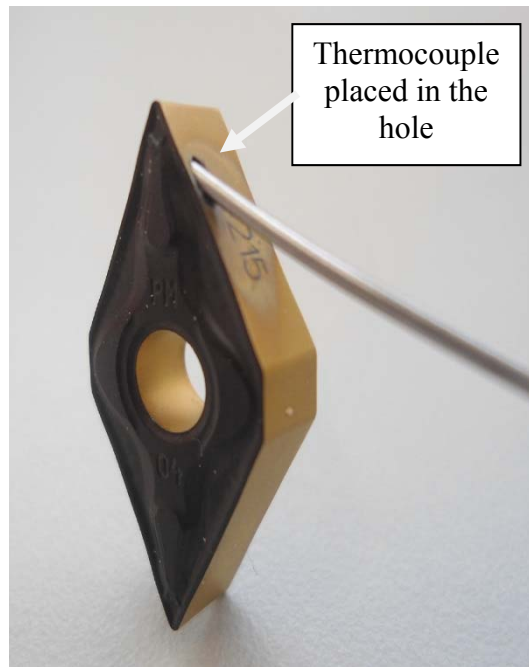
Photograph of the tool insert with the thermocouple in the hole
